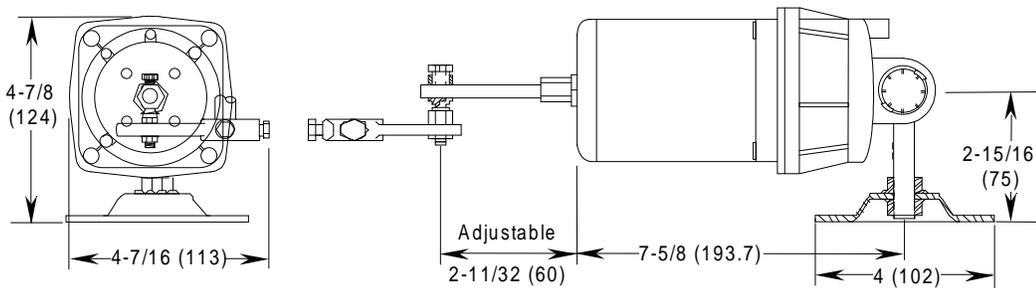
D-4073 with Auxiliary Mounting Bracket, inches (mm)
